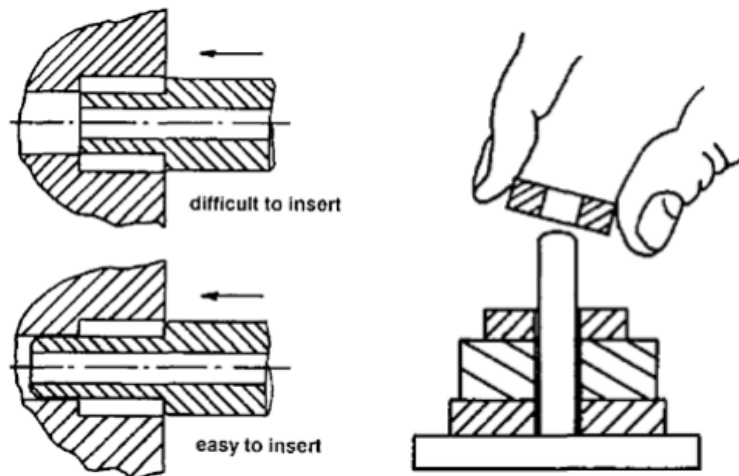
Tapered shafts and pyramid assembly, just two examples of the principles presented in *Product Design for Manufacture and Assembly*.
